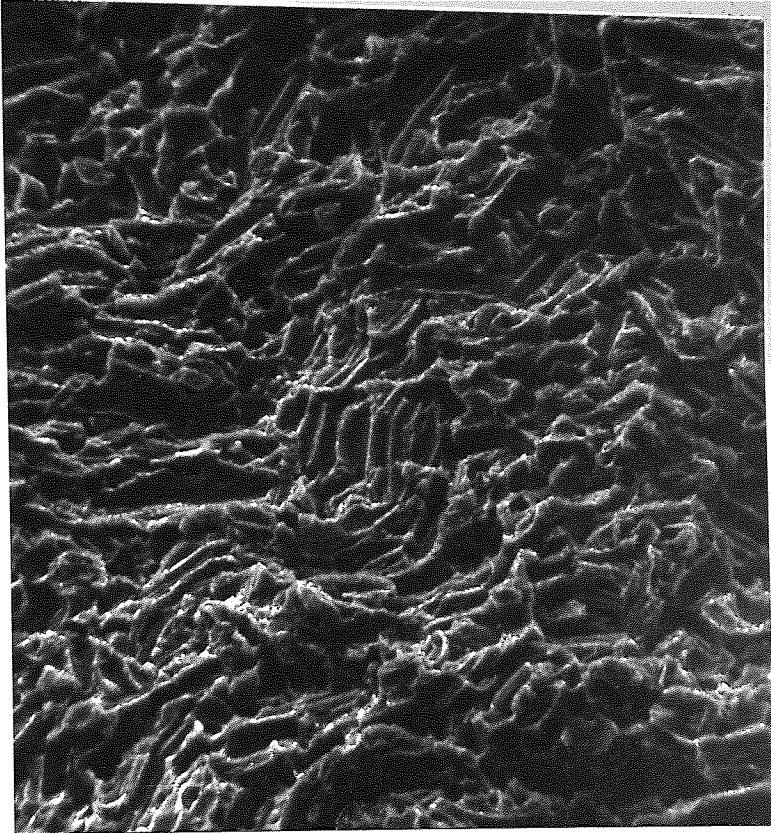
(a) FRACTURE SURFACE FROM ORIENTATION A - IMI 700
